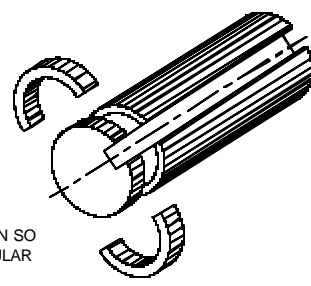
LOWER FLANGE SO THAT WEIGHT IS SUSPENDED ON CIRCULAR KEY.
